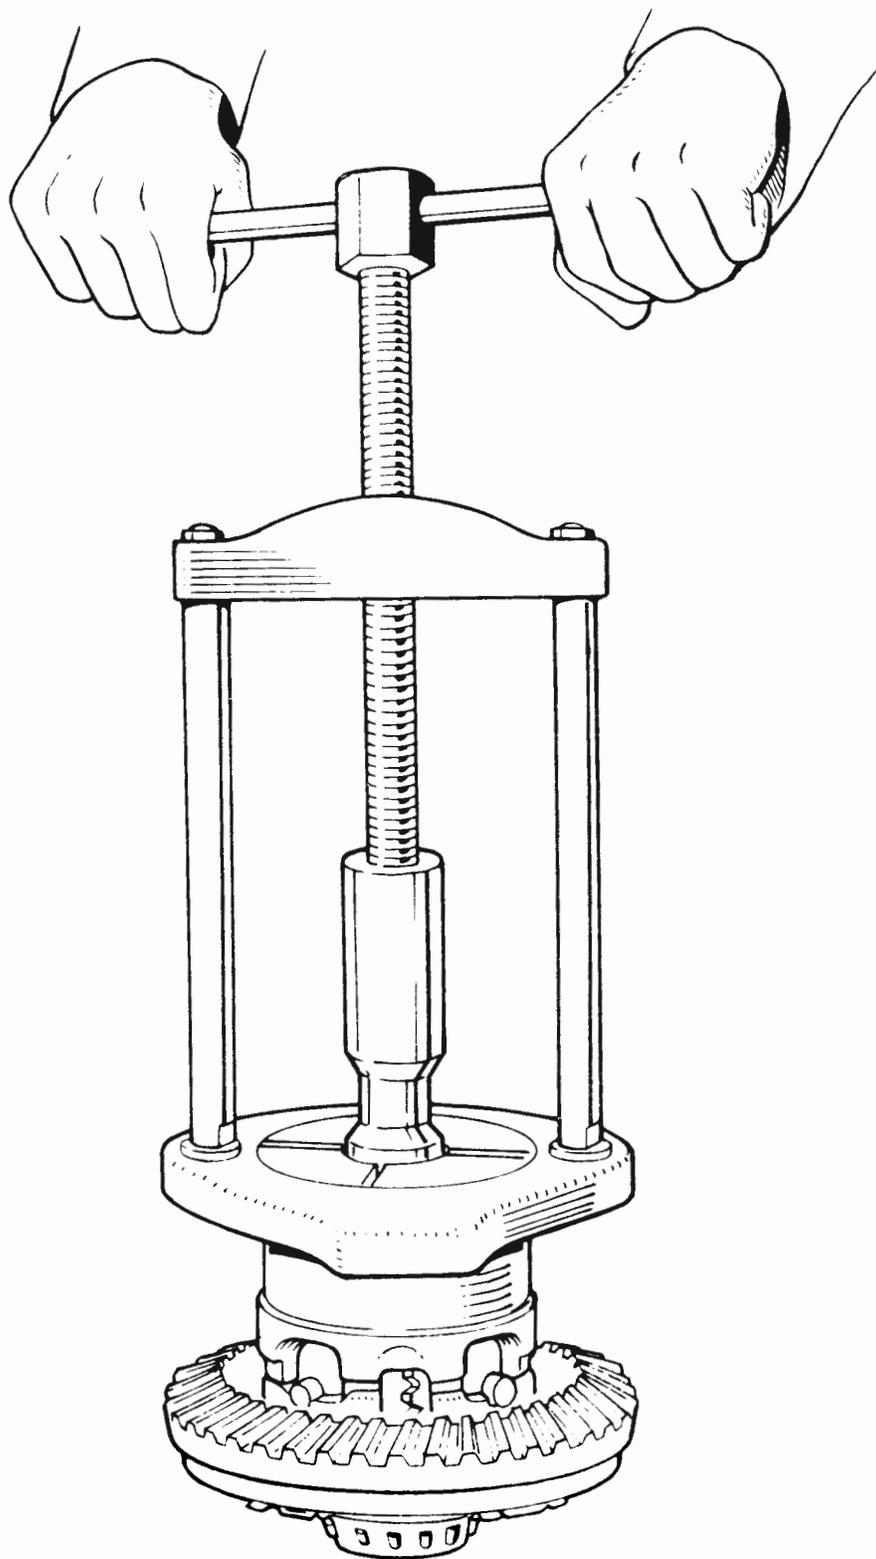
WITHDRAWING A DIFFERENTIAL BEARING USING TOOL NO. SE.103
